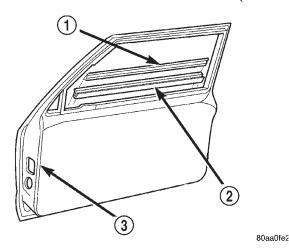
Front Door Inner/Outer Belt Weatherstrip
